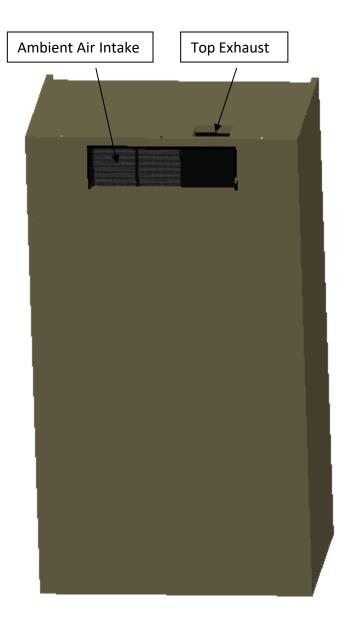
Cooling Unit Installed (Top Exhaust)
